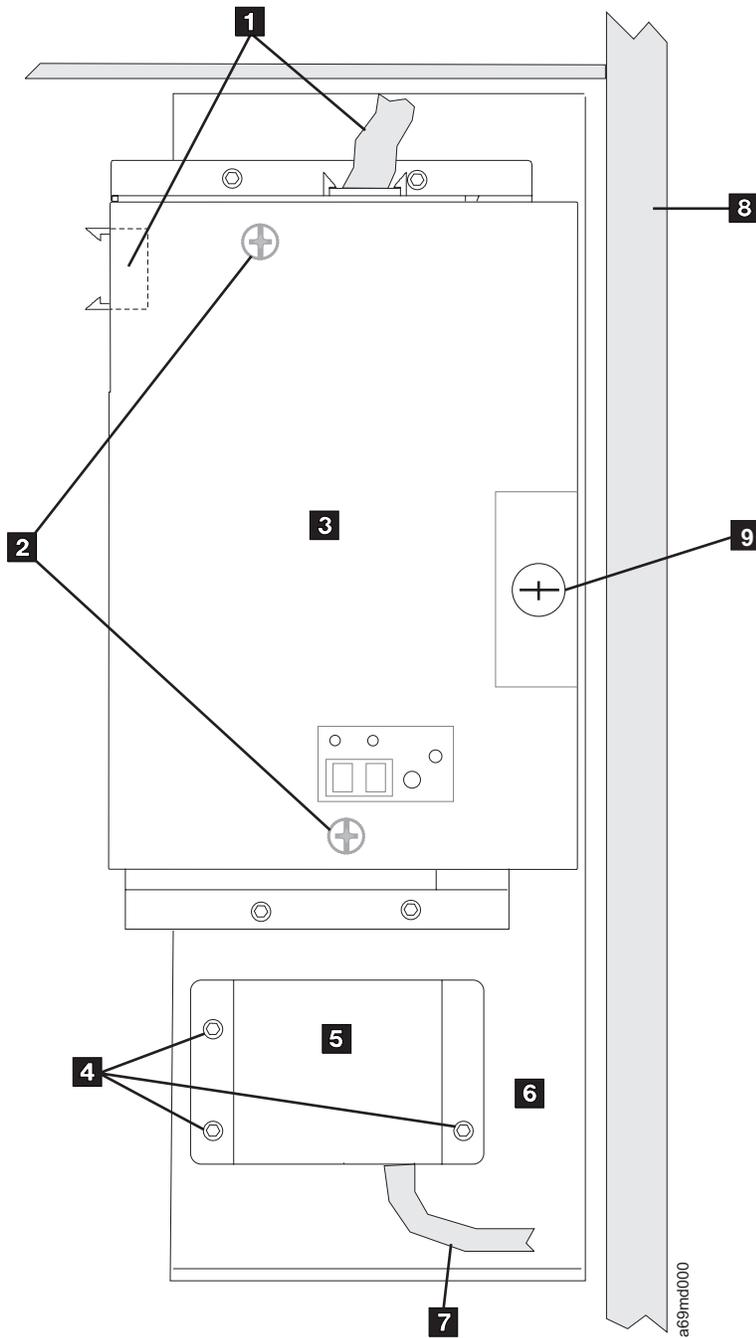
Power Switch and Cable Assembly. (Viewed from rear of operator panel)
